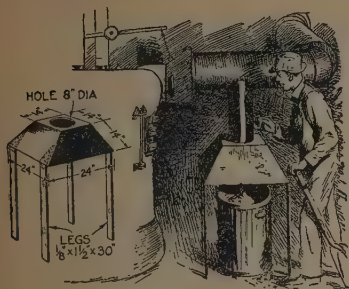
An ash dust hood that exhausts into the smoke pipe.
